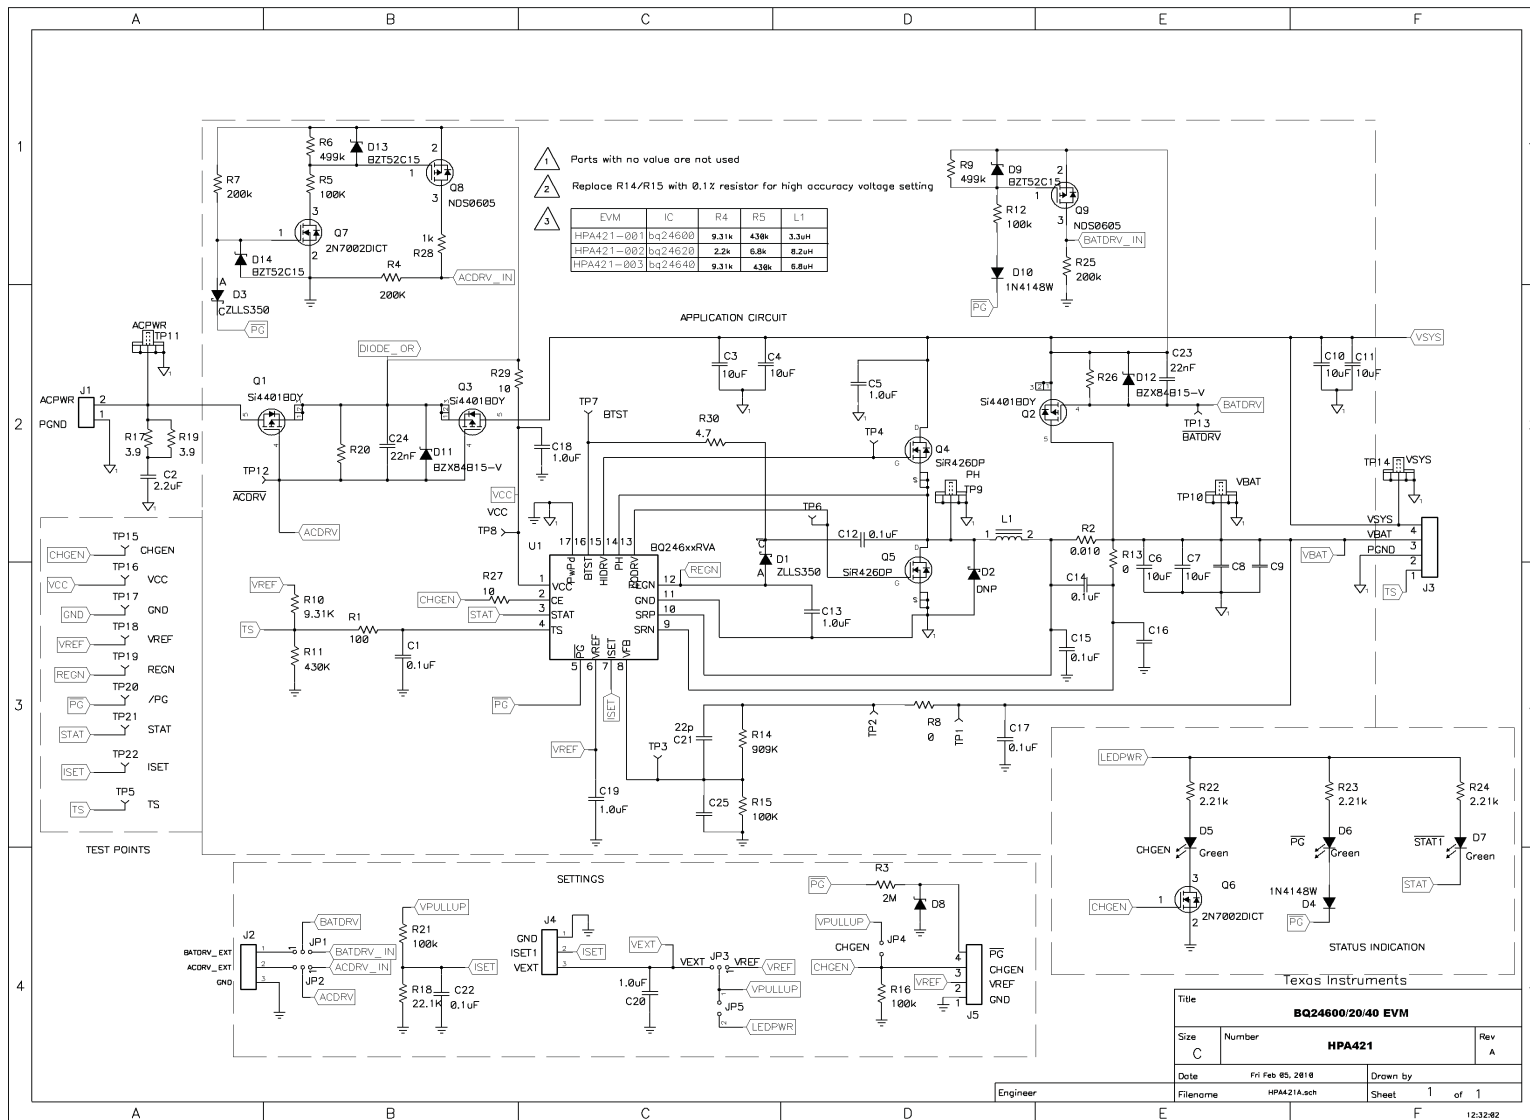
bq246xx EVM Schematic (Sheet 1 of 1)
